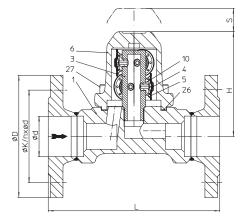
1....6K2 (DN40-50) with 6 capsules, with flanges
